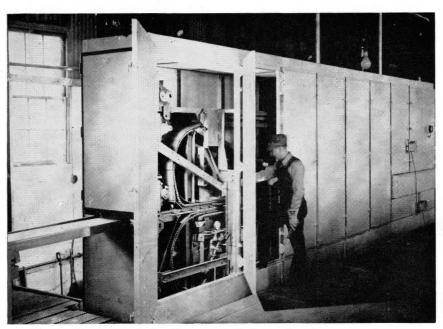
Continuous hydraulic press with inspection doors open to view mechanism of discharge end. $\,$
